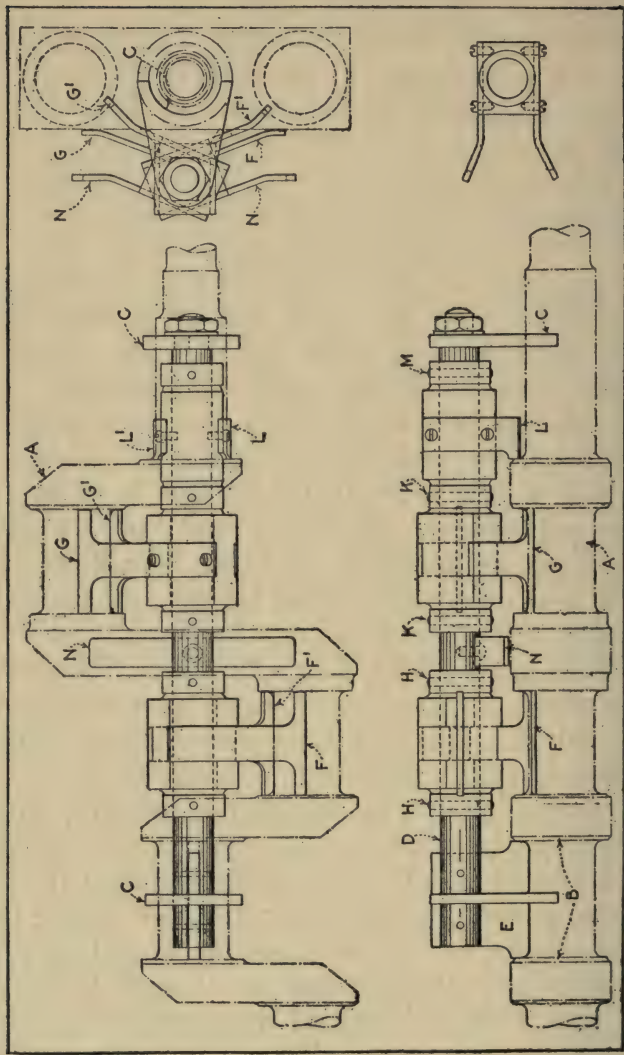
FEELER GAUGE FOR AN AUTOMOBILE CRANK SHAFT
